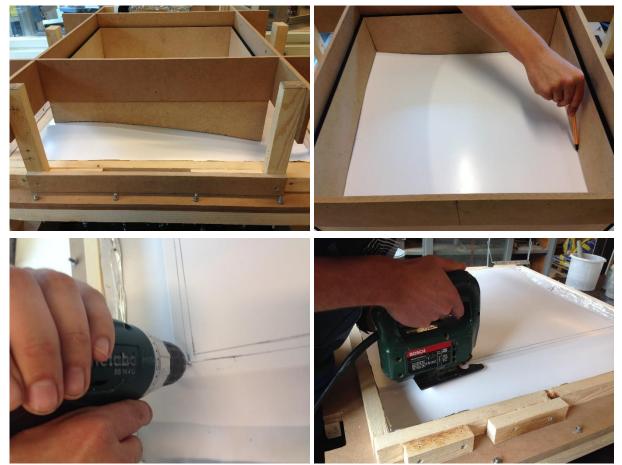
& 121b: The edges, which are milled, can be placed to the frame and now it is easy to draw the right dimensions, Figure 121c & 121d: Drilling and sawing the sheet
